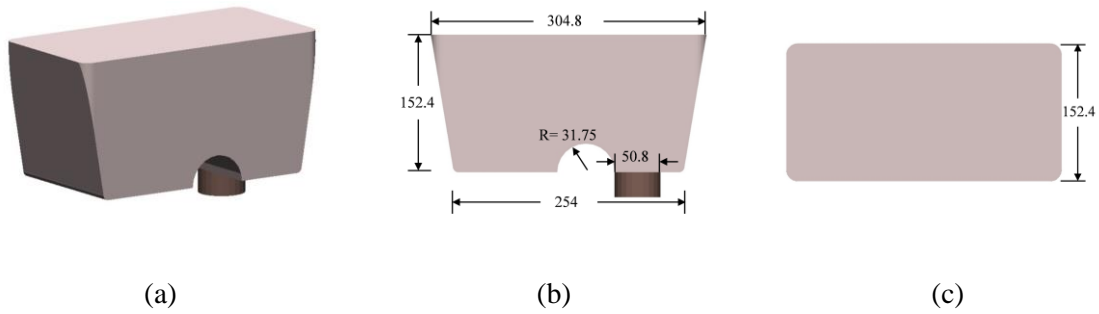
Geometry of the offset step pouring basin: (a) isometric view, (b) front view, and (c) top view. All dimensions in mm.
